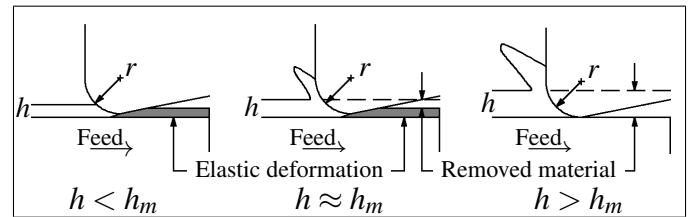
Schematic representation of the minimum chip thickness in orthogonal cutting (r : edge radius of the tool, h : depth of cut, h_m : minimum chip thickness), inspired from [1]
